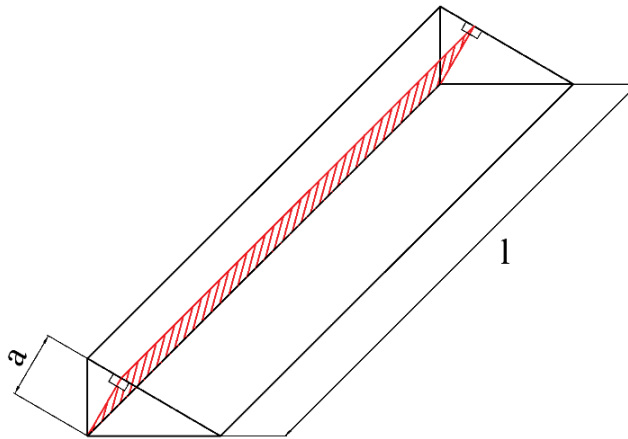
Welding beam parameters for incomplete penetration joints.
